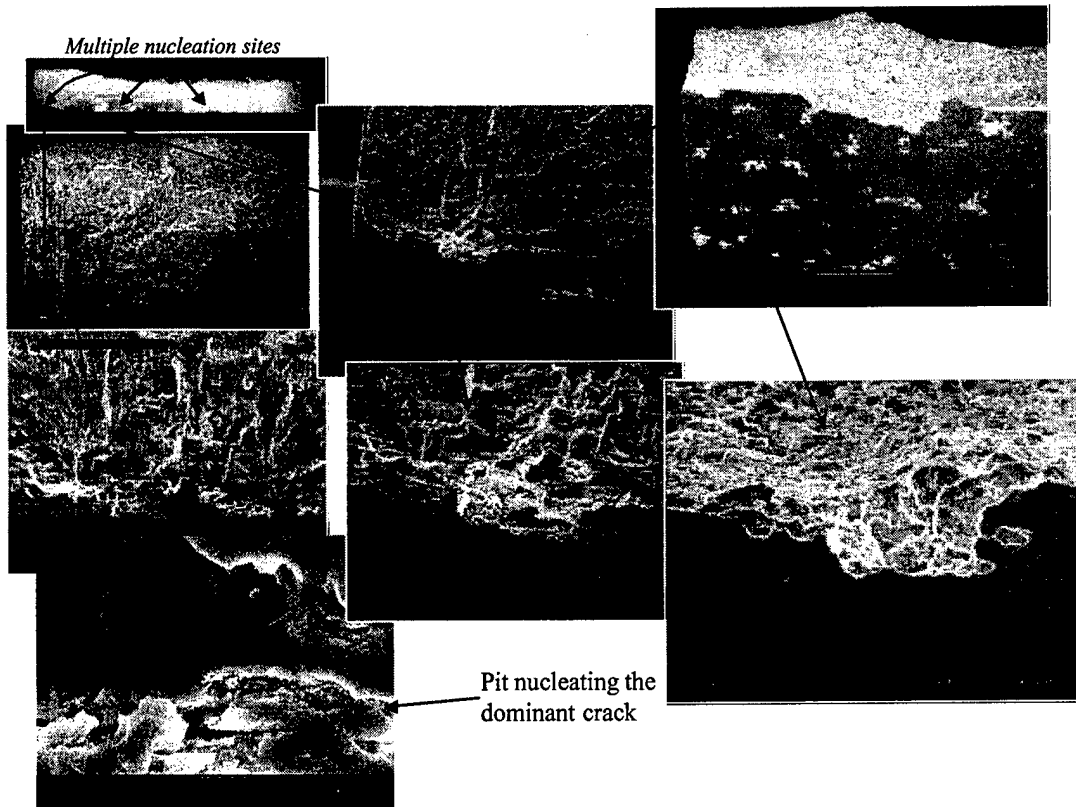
Fracture Surface of Specimen 48-3 Showing Cracks Nucleating From Multiple Pits and Coalescing Into Single Crack
